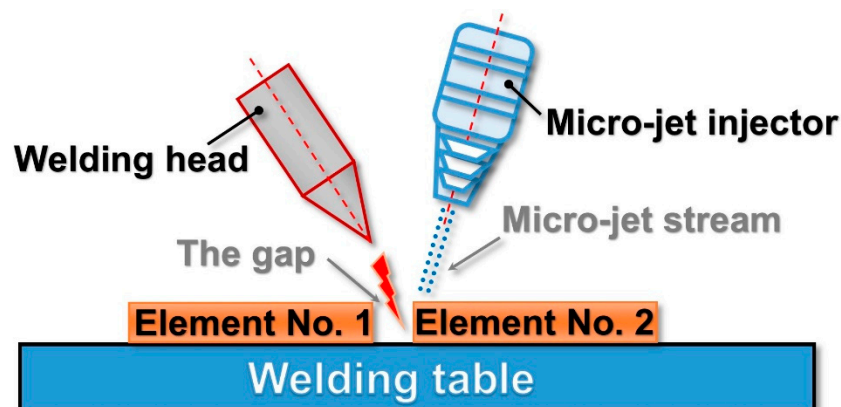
A scheme of Metal Active Gas (MAG) welding with micro-jet technique.
